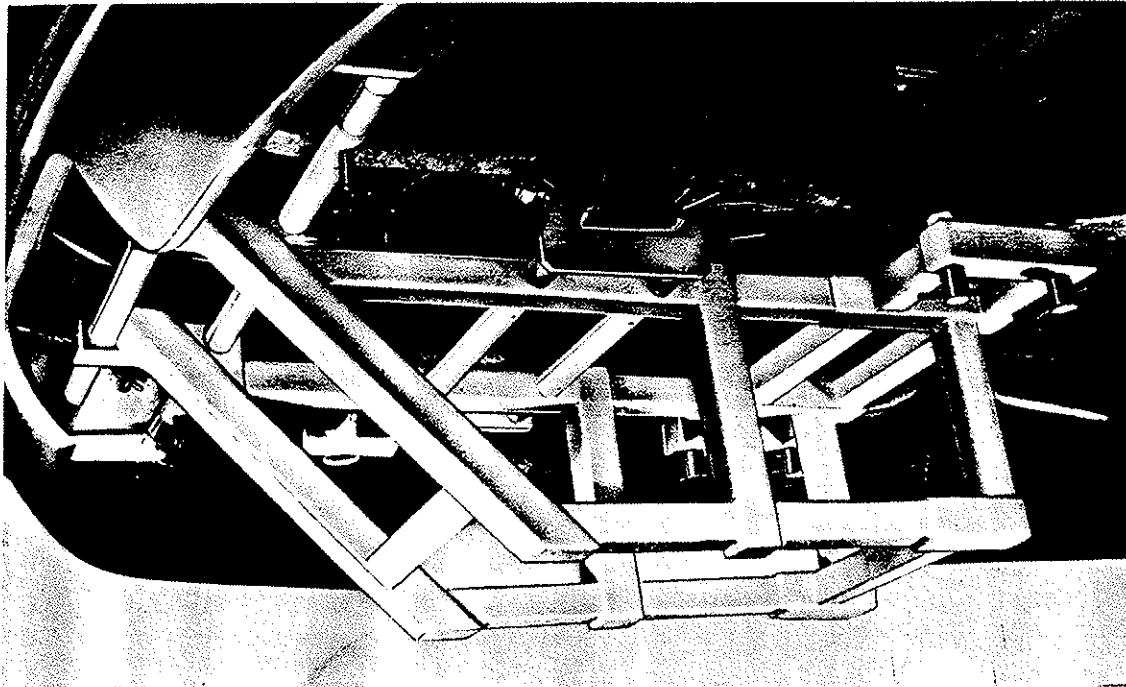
Checking front end alignment using Churchill Tool No. R.G.310A
